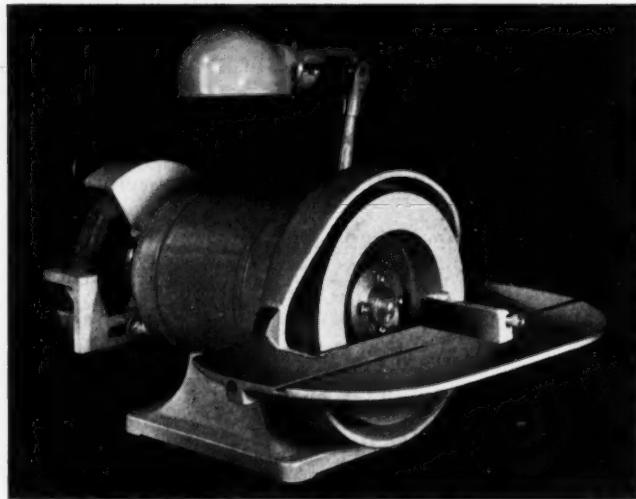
A Tool Grinder Adapted for the Use of Cemented-carbide Tools. The New Diamond Wheels May be Used if Desired
